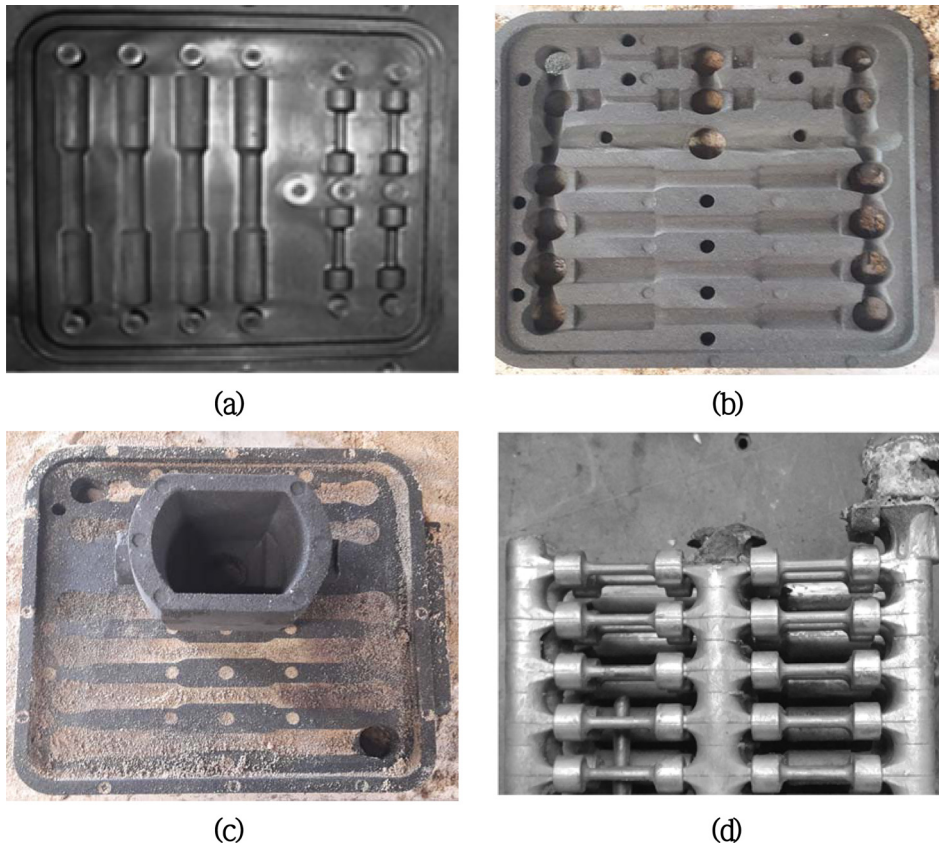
Die to produce shell plate for stack mold, (a), upper planes of bottom, (b), and top plates, (c), and test casting obtained after shake out, (d).
